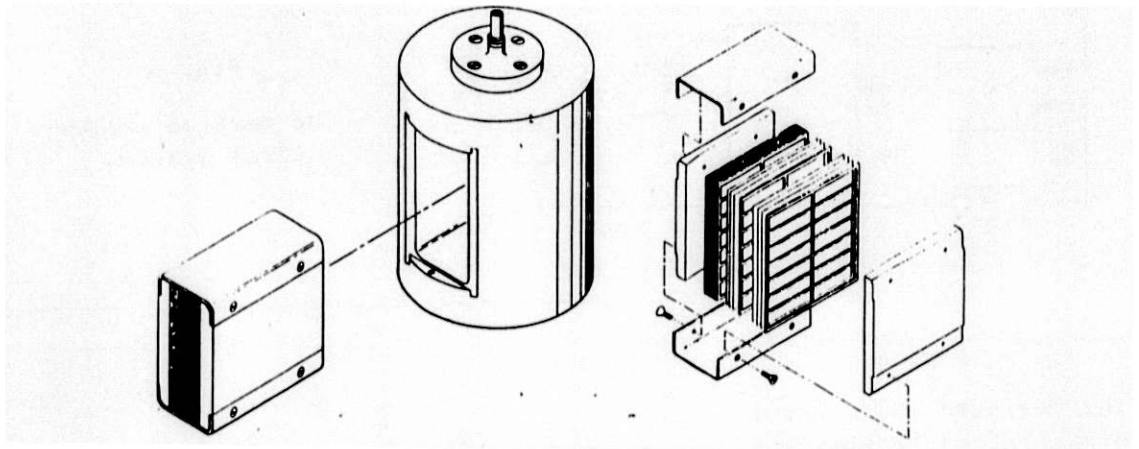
A drawing of the Al shell chopper with the Al shell in the center, a foil package to the left and an exploded view of the foil package to the right.
